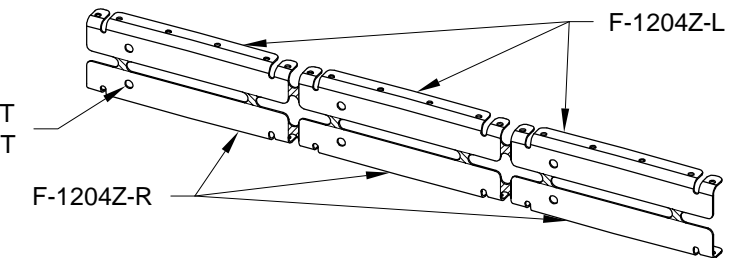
SEPARATING THE F-1204Z BOTTOM STIFFENERS
